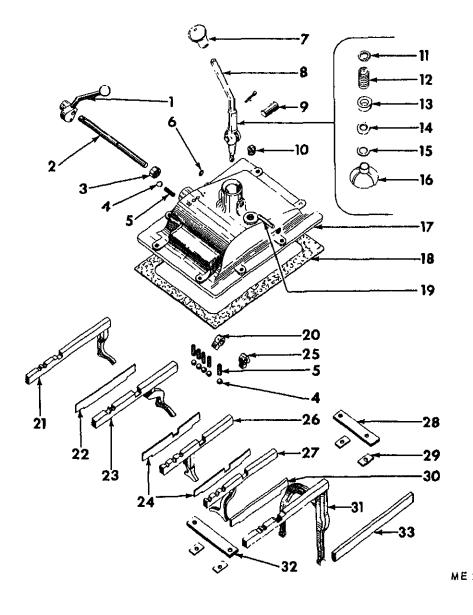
Gear Shifter Mechanism And Transmission Case
